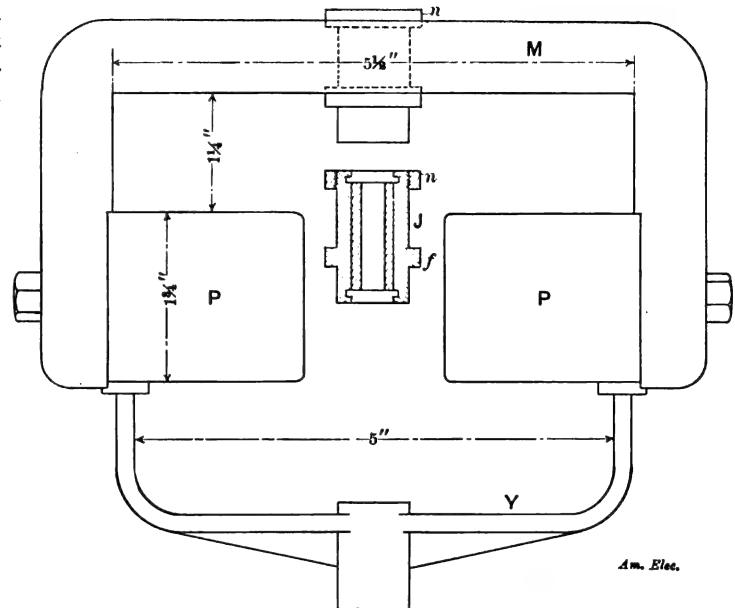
PLAN VIEW OF MAGNET AND JOURNALS.
